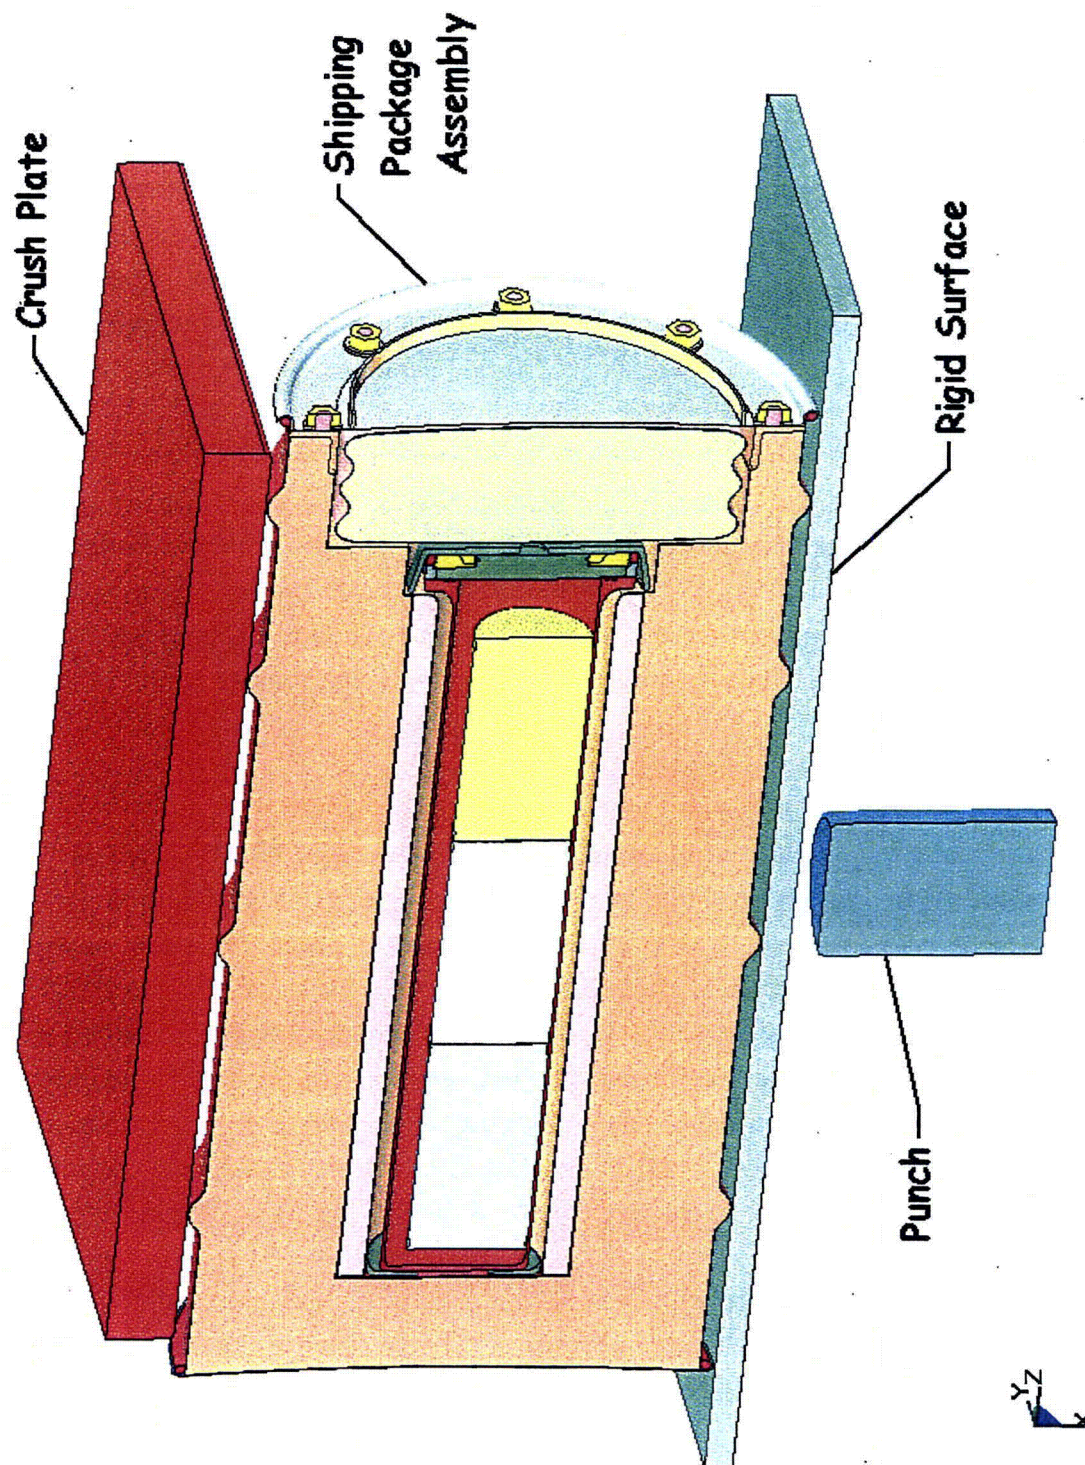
Typical ES-3100 Detailed Model Assembly
